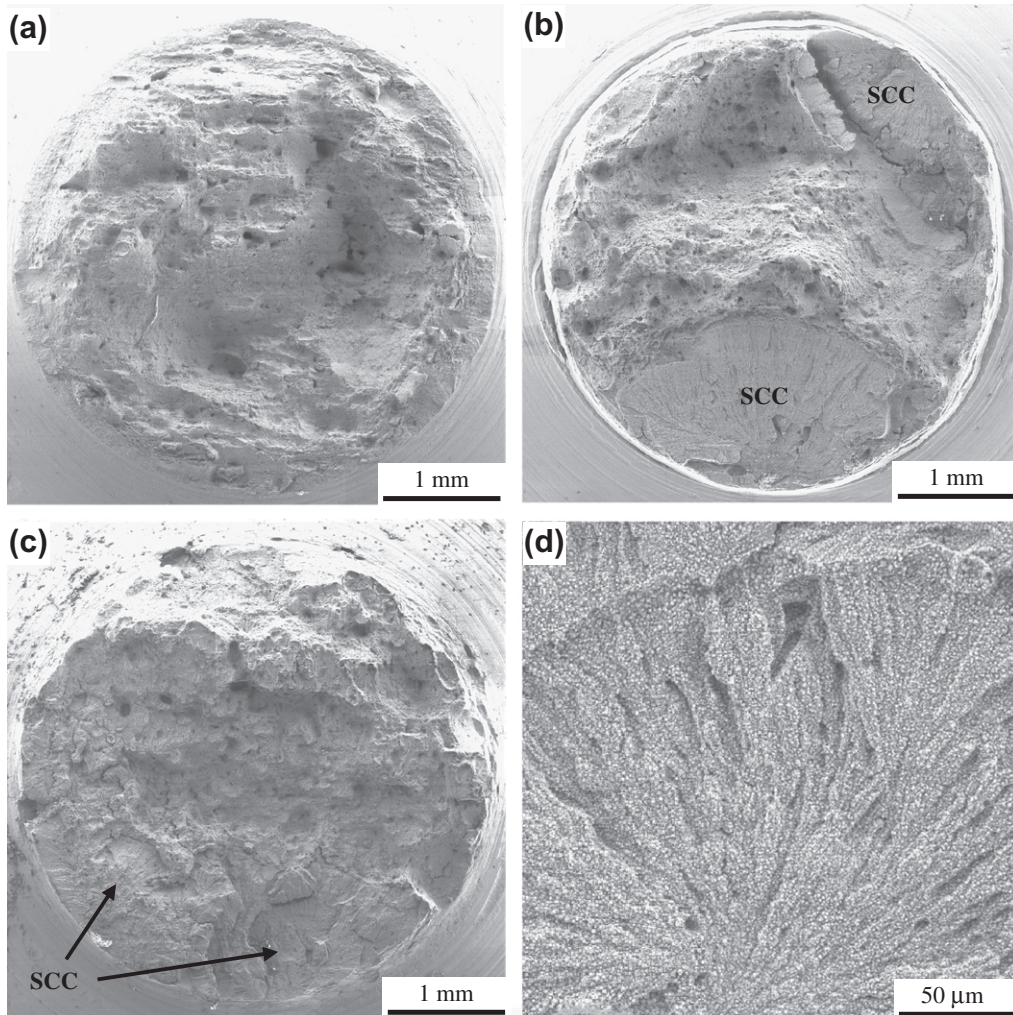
Fractographs of the HAZ specimens after the CERT tests: (a) macroview of the high heat input specimen tested at 3×10^{-4} mm/min; (b) macroview of the high heat input specimen tested at 1×10^{-6} mm/min; (c) macroview of the low heat input specimen tested at 1×10^{-6} mm/min; and (d) typical feather-like patterns in the transgranular SCC area.
